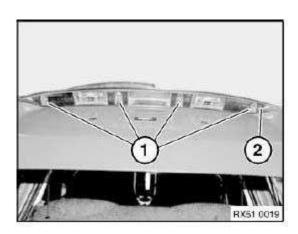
Identifying Screws On Strip Handle Courtesy of BMW OF NORTH AMERICA, INC.
